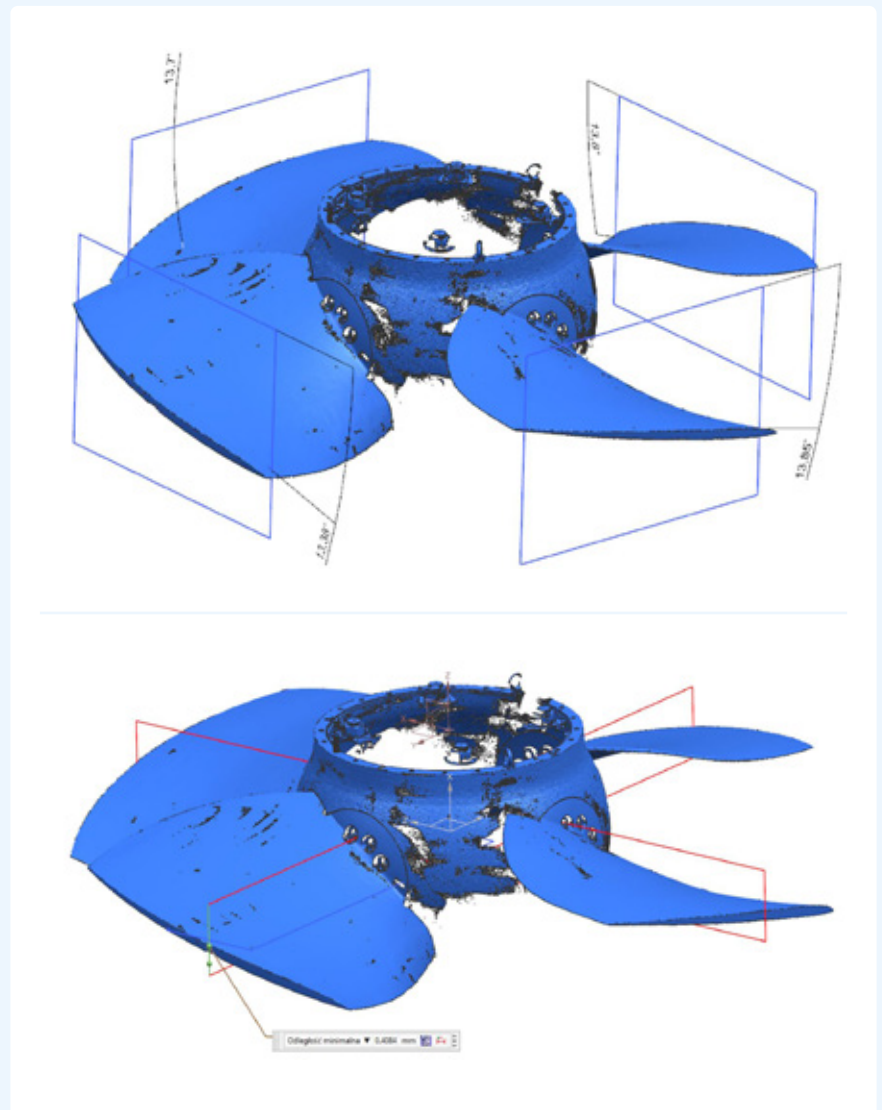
The process of measuring the blade angular position (left) and measuring the blades relative to the nominal runner diameter after final assembly
